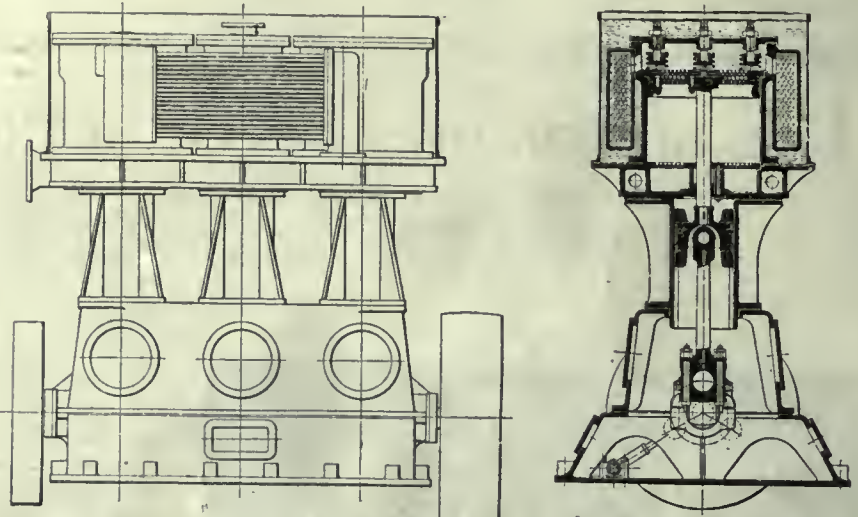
SCOTT INTERCOOLER COMPRESSOR DEVELOPED AT STOREY WORKS, MANCHESTER.
